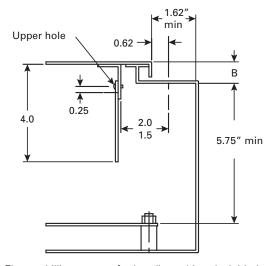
Flange drilling pattern for handle and interlock blade mounting.
